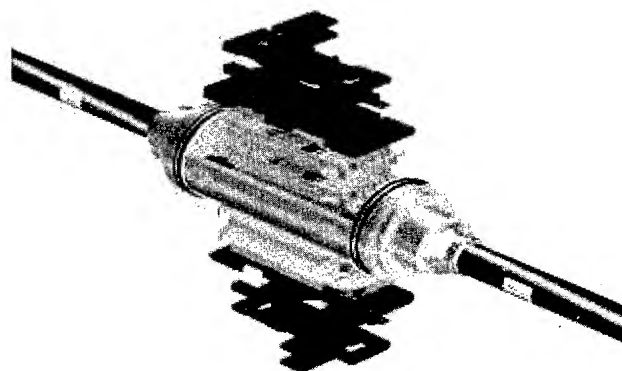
RAB exploded view (48 fibre pairs). Cylindrical outer housing and two bend restrictors have been omitted for clarity
